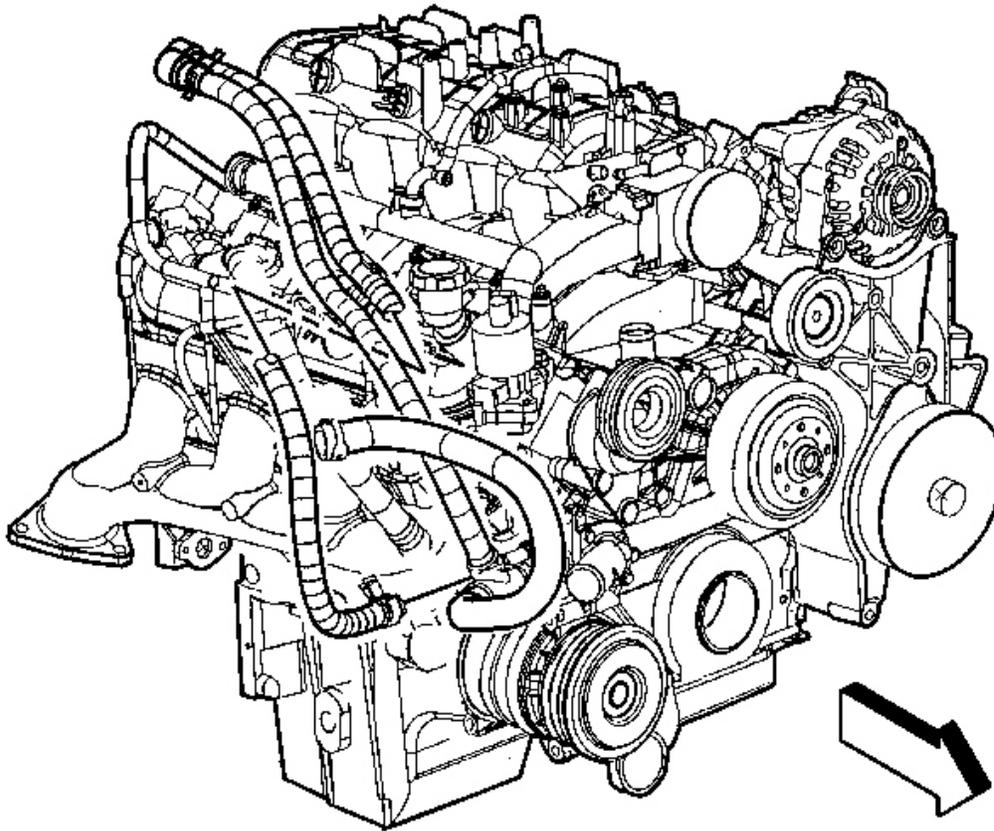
View Of Inlet & Outlet Heater Hoses (LR4, LM7, LQ4) Courtesy of GENERAL MOTORS CORP.
